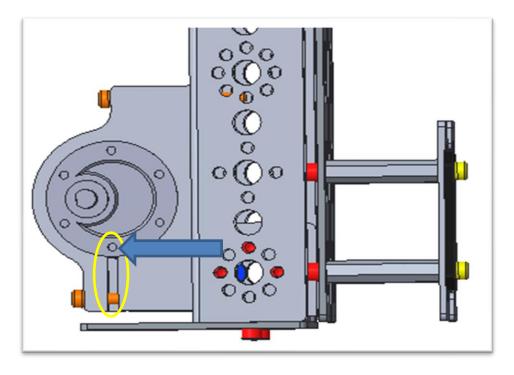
Left rail motor view highlighting the axle mounted away from frame
